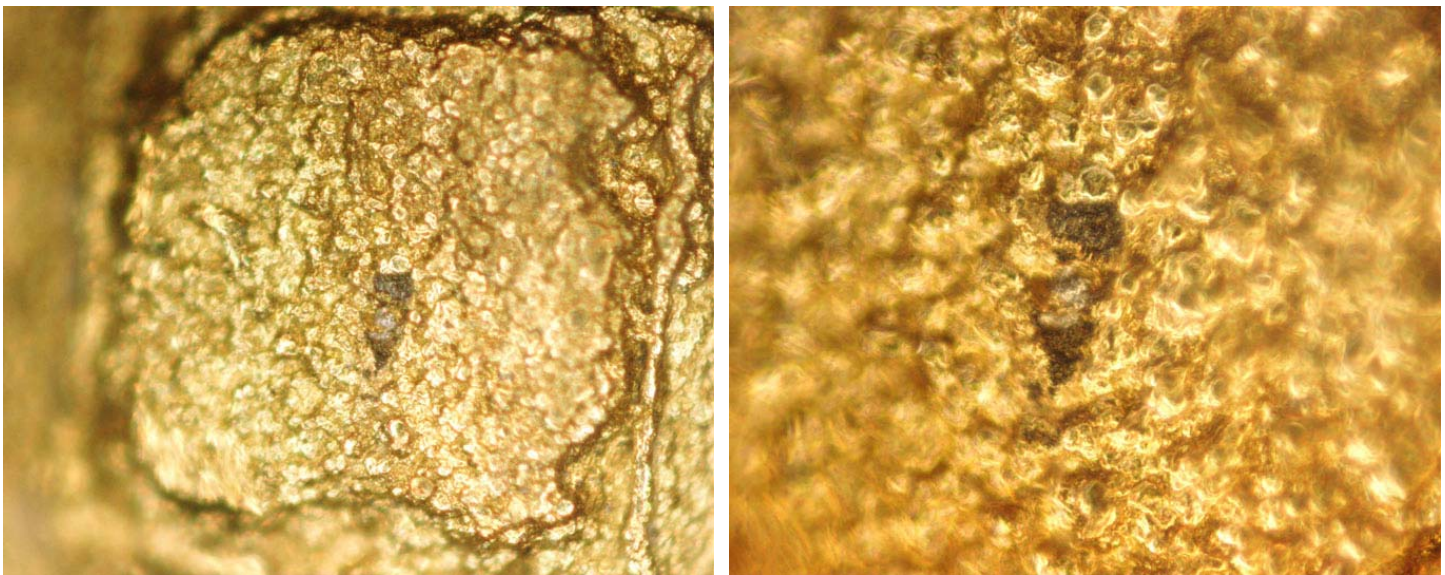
Optical images taken prior to removal of D9 from the assembly show the same area and the remaining wire bond foot-print on the gold plated surface.
